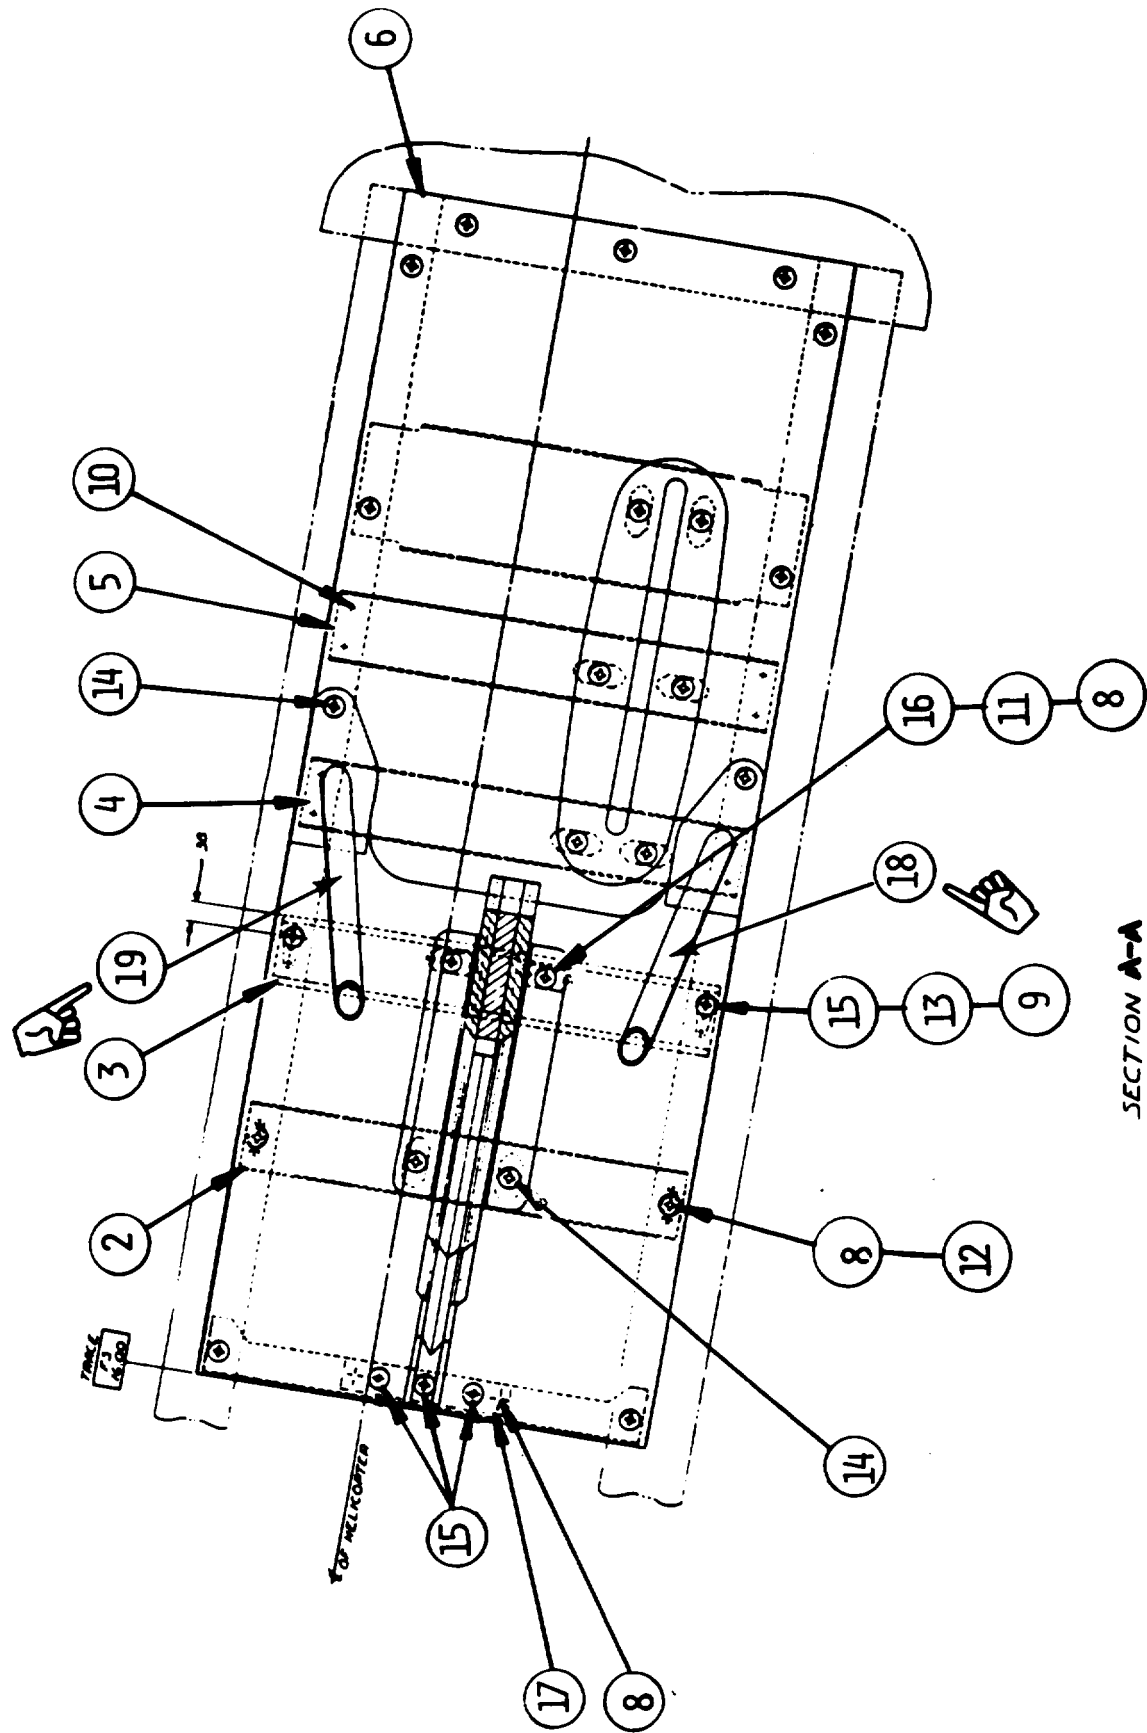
LOWER CUTTER INSTL. - SHEET 2 OF 3
